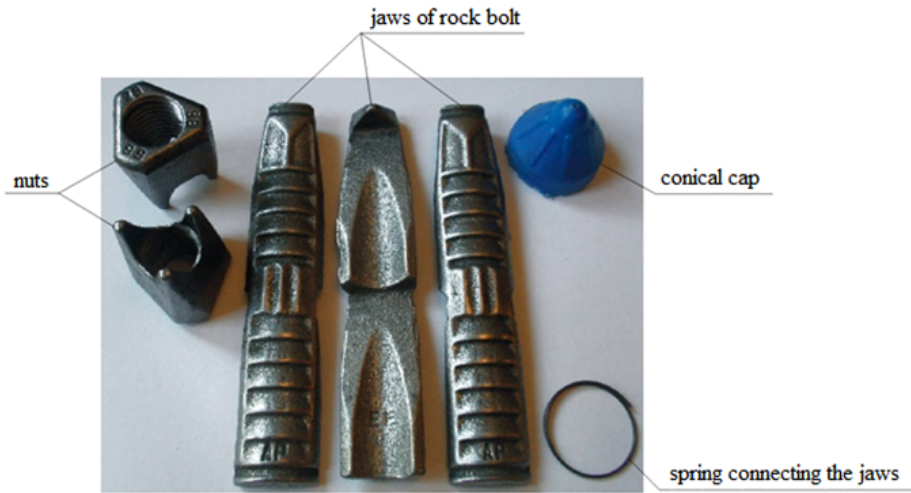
Head expansion components (photo. K. Skrzykowski)
